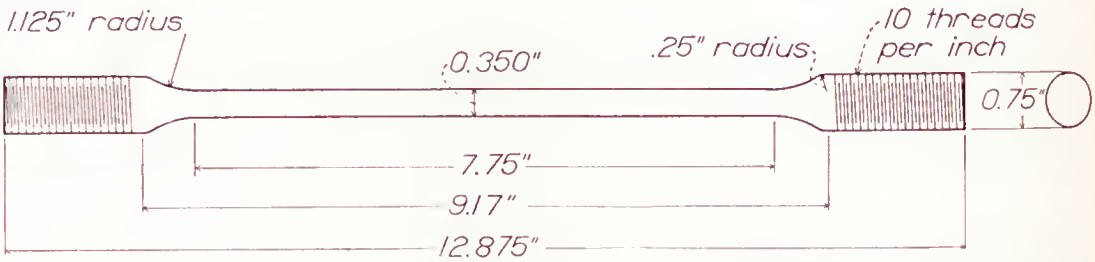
Dimensions of the Haigh fatigue specimens used for the 13,000 pounds per-square-inch stress amplitude.
